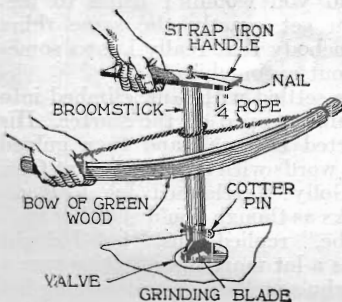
This simple valve grinding outfit will do good work and is easy to make. The bow should have just enough tension to keep the rope taut
